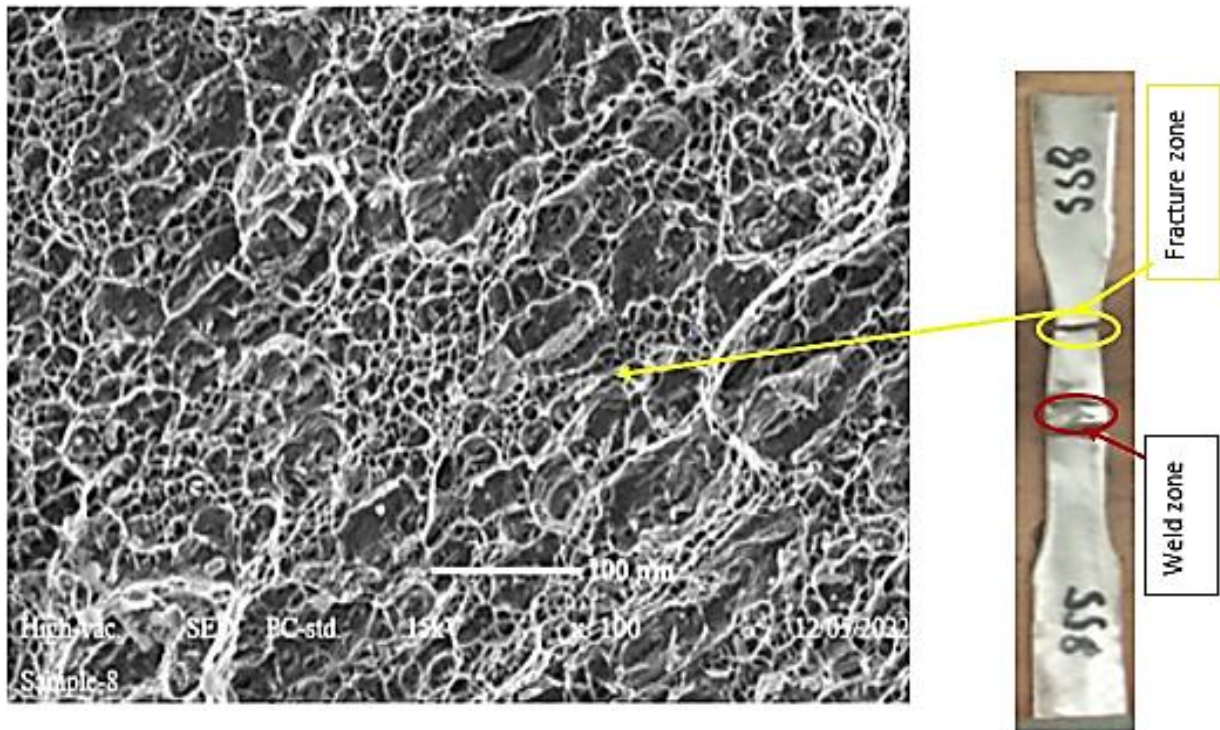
Tensile fracture surface, obtained in the base metal of 316 stainless steel
